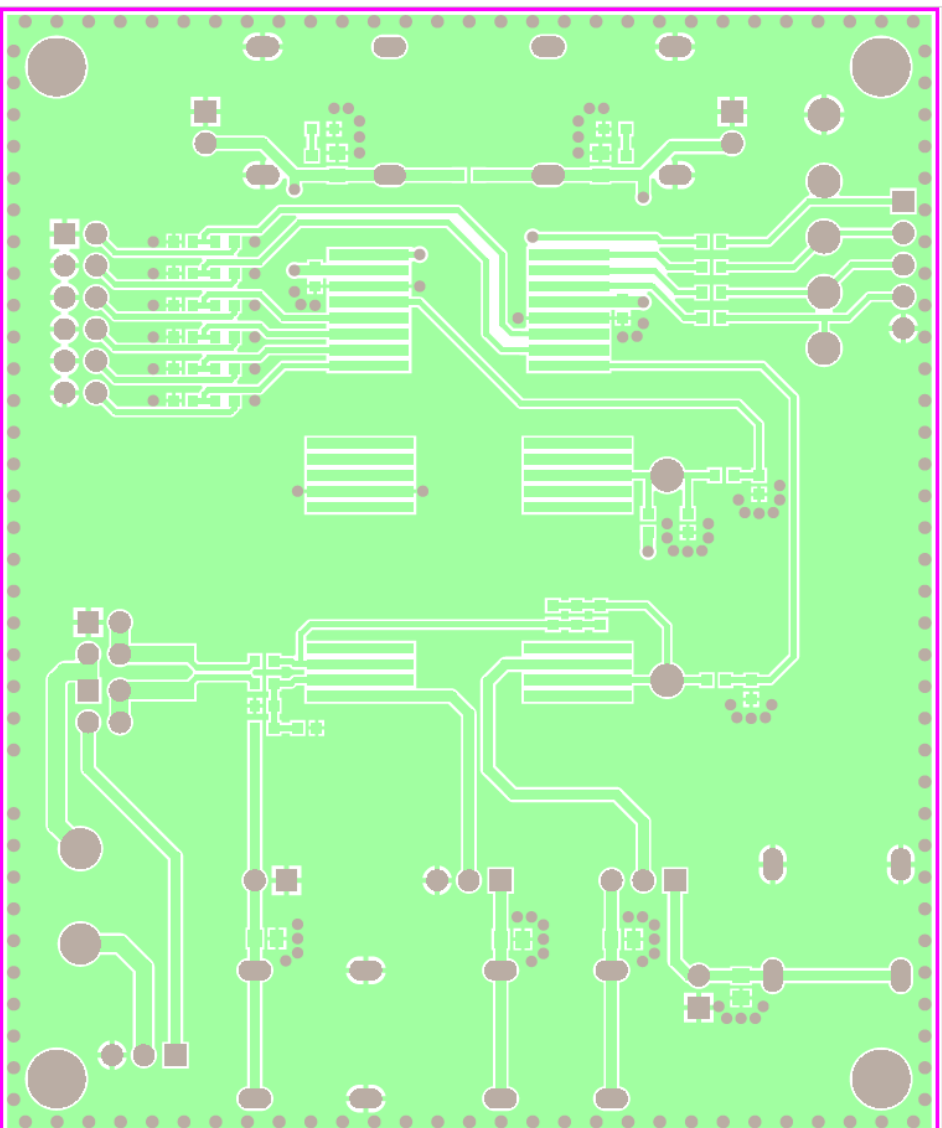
EVAL-RHFAD128V2 board PCB bottom layer
